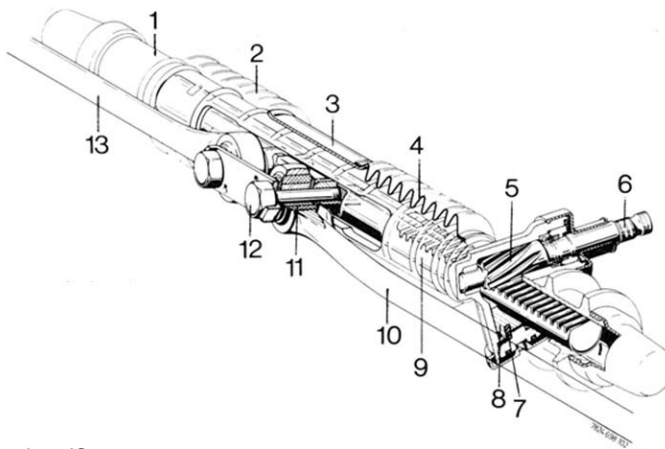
Rack and pinion: 1 - housing, 2 - dust cap, 3 - steel tube, 4 - dust cap, 5 - pinion, 6 - connection with steering column, 7 - spring, 8 - rack support, 9 - drag rod, 10 - silent bloc, 11 - bolt, 12 - drag rod.
